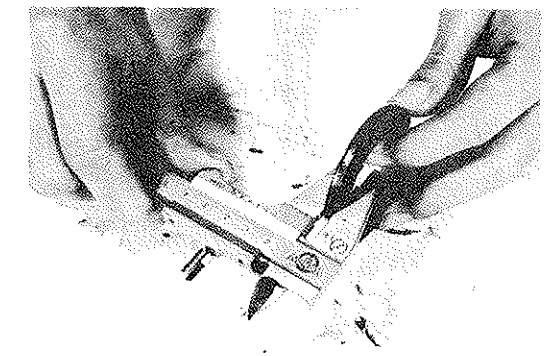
Transfer Input Gear Thrust Washer Check
